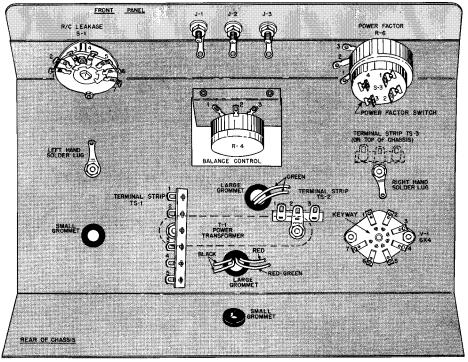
MOUNTING THE PARTS ON THE CHASSIS
